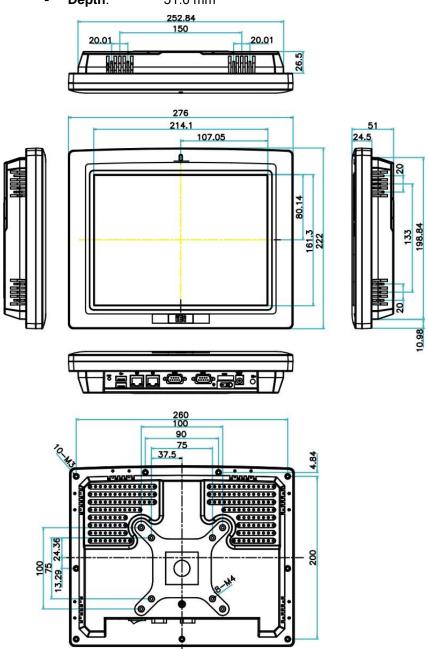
AFL-10A-N270 Top and Bottom Panel Dimensions (mm)
